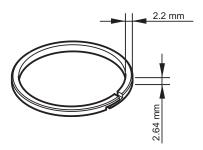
Smallest accepted dimensions of the TTX damper piston band.
